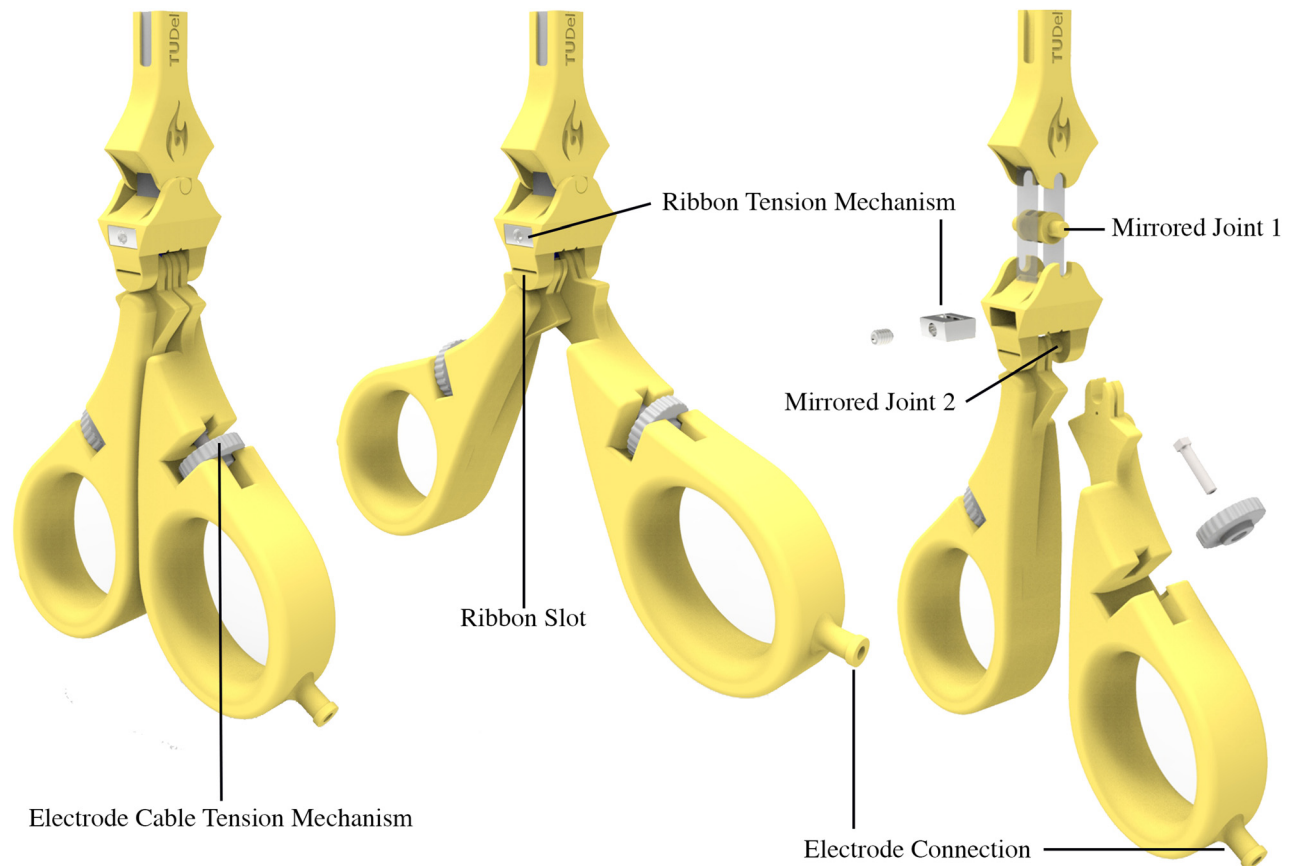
Final handle design. The handle allows for steering the two joints by mirroring the joint in the handle, opening and closing of the tip jaws, tensioning the steering ribbons and electrode cables, and connecting the electrosurgical unit. Left: total handle design in the closed configuration. Middle: Handle in the open configuration. Right; exploded view of the handle.
